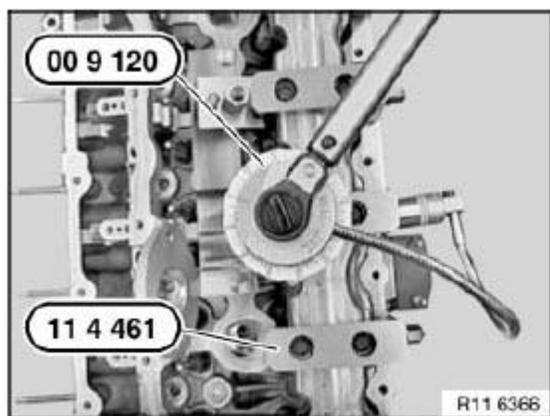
Tightening Lower And Upper Bearing Banks With Special Tool
